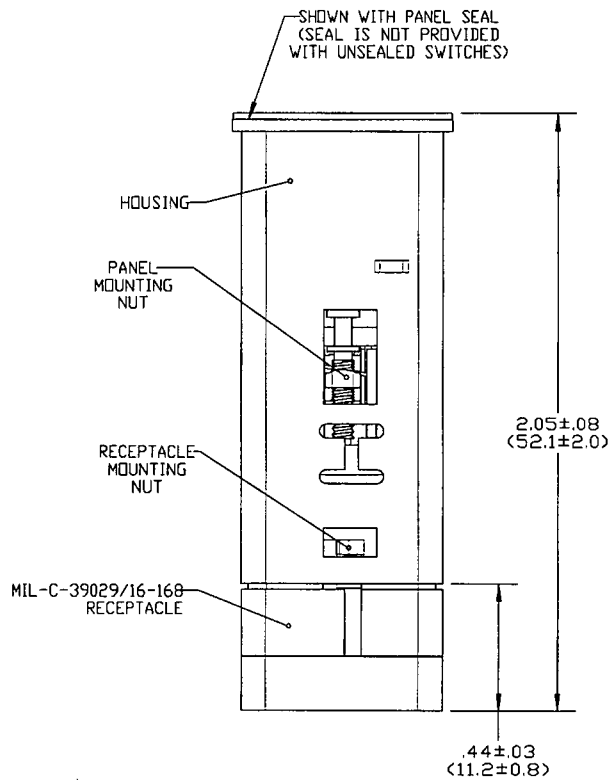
Model 9816 through 9820 Assembly Shown with Panel Seal and without Sleeve or Spacers
